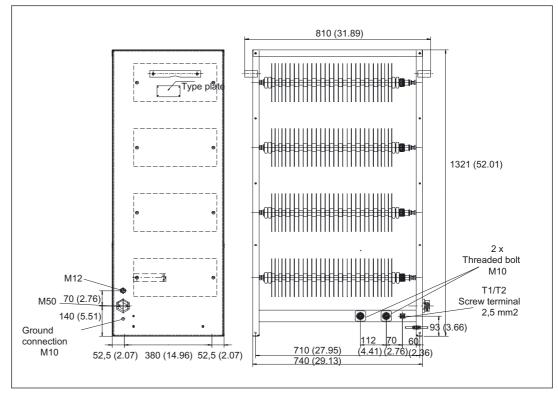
Dimension drawing, 50 kW/250 kW resistor
